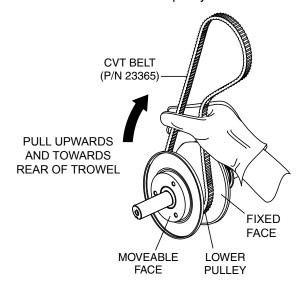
Holding Lower Pulley Open UPPER PULLEY BELT INSTALLATION
